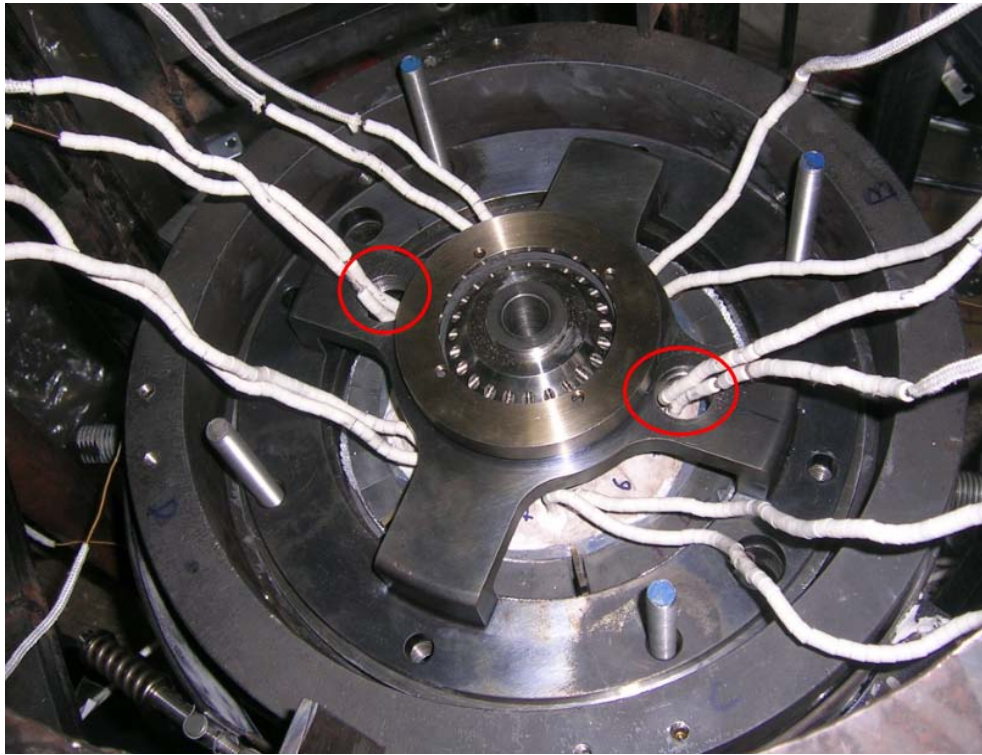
Holes on the catcher bearing stator plate for passage of bearing wires
